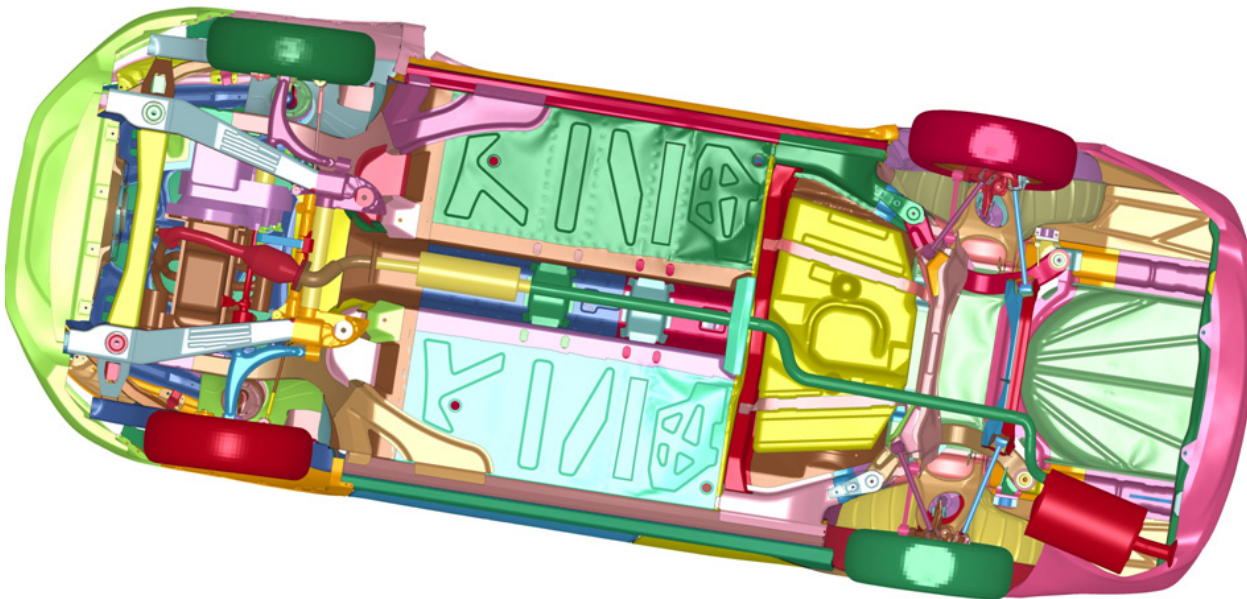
9: Bottom view of light weight vehicle after NCAP frontal crash test
